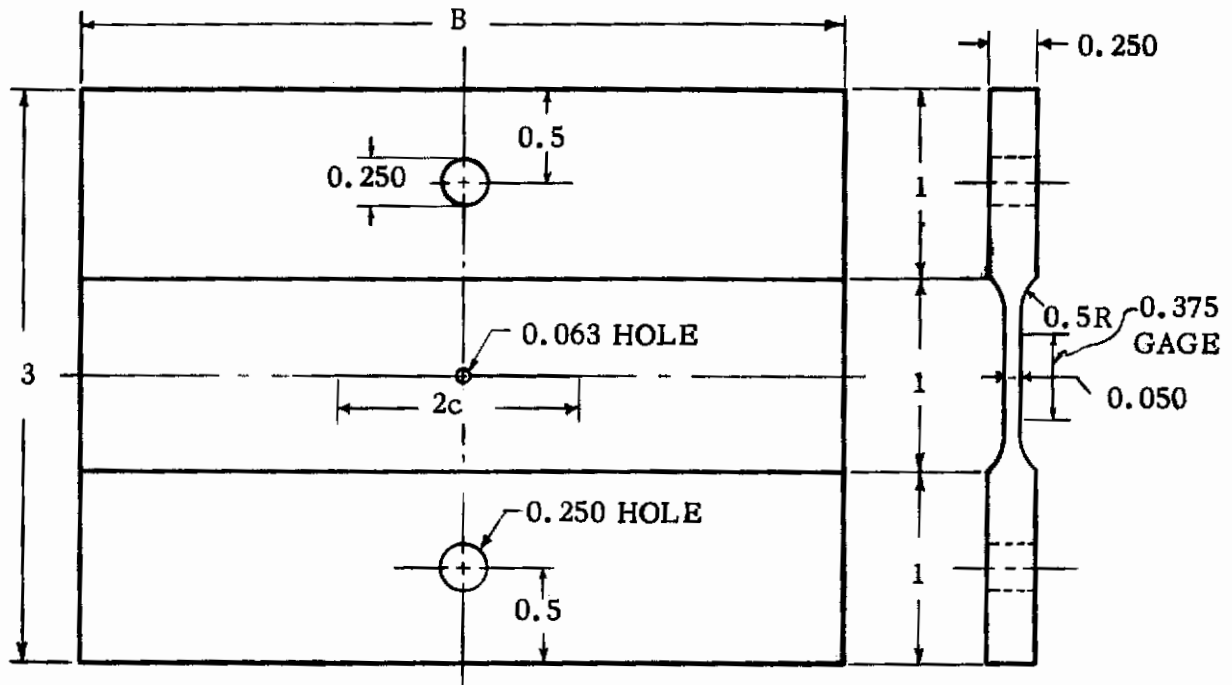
7075-T6 ALUMINUM SPECIMEN
